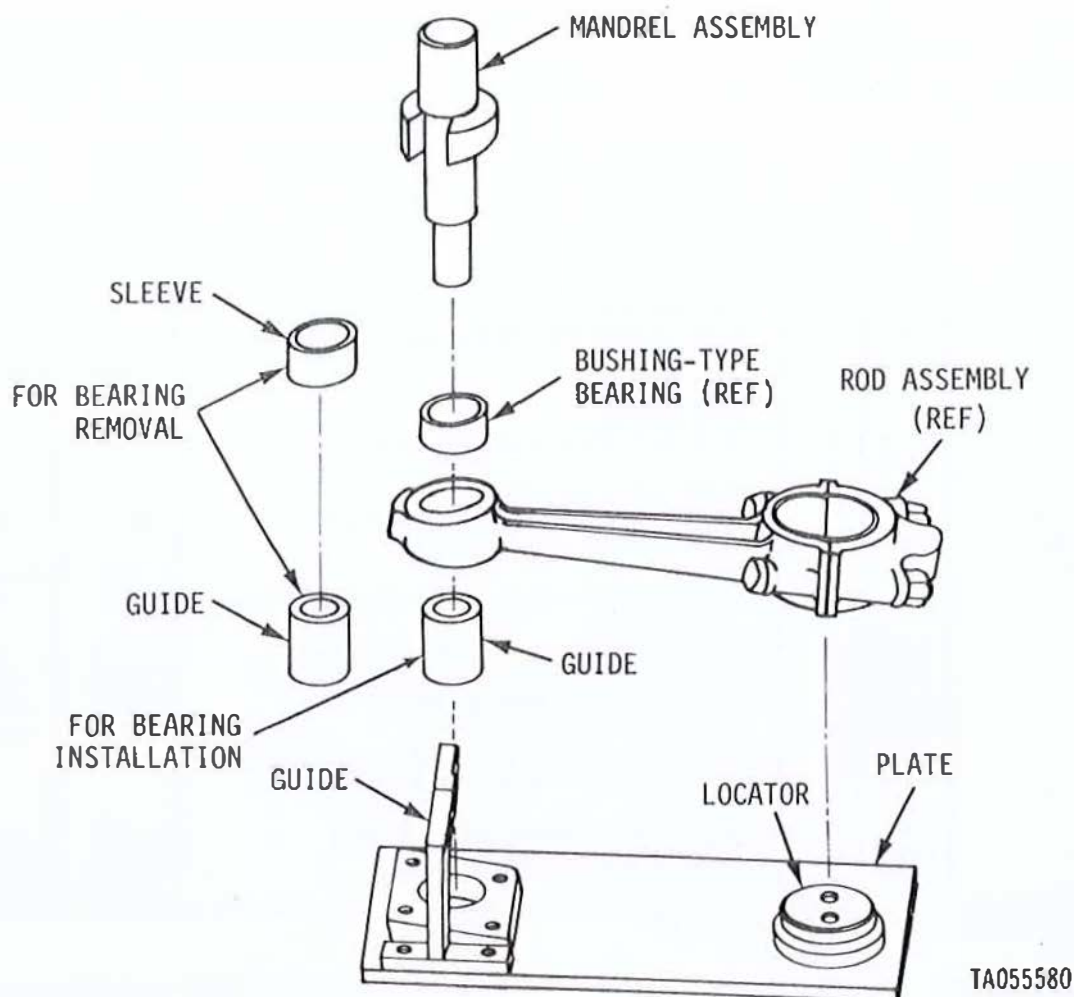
Removing or installing bushing-type bearing using improvised tool.
